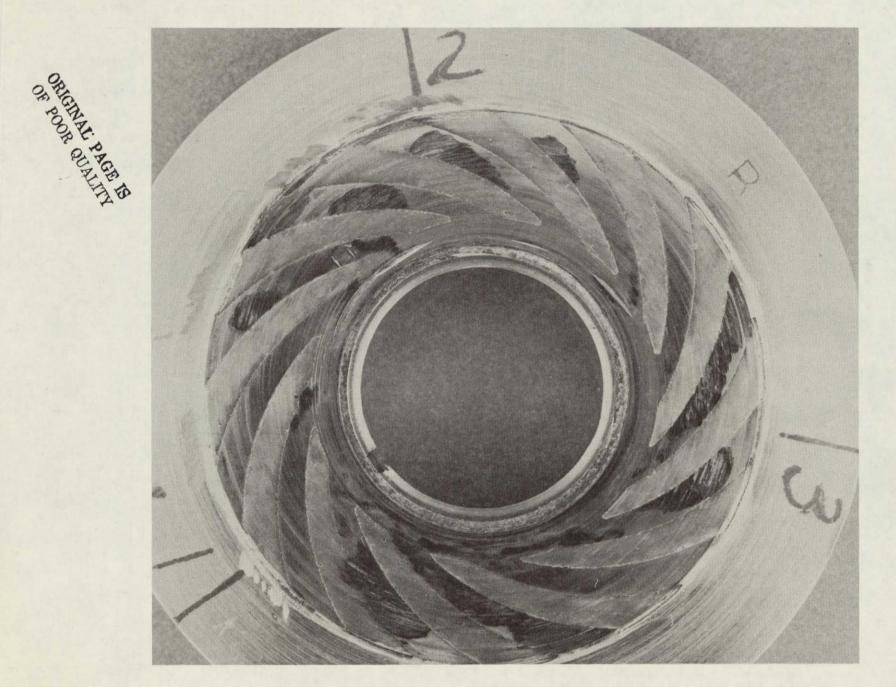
Spiral Groove LOX Seal Mate Ring, Some Carbon Pieces, and Housing (Build 8, Posttest 332)
